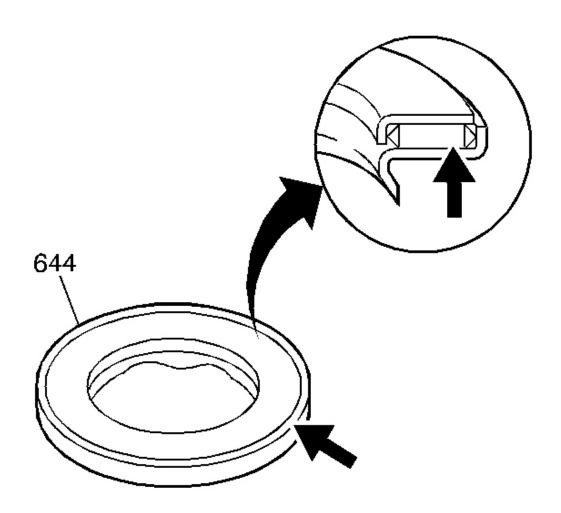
View Of Input Shaft Thrust Bearing Assembly Courtesy of GENERAL MOTORS CORP.
